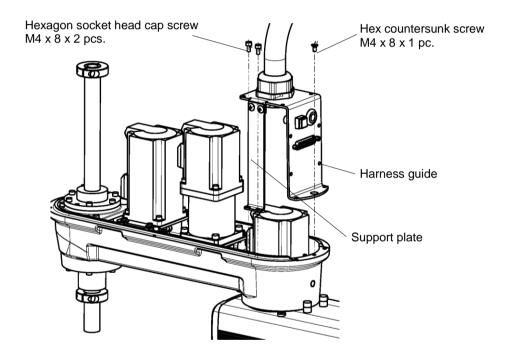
Dismounting harness guide and support plate (KHL-500, KHL-600, KHL-700)
